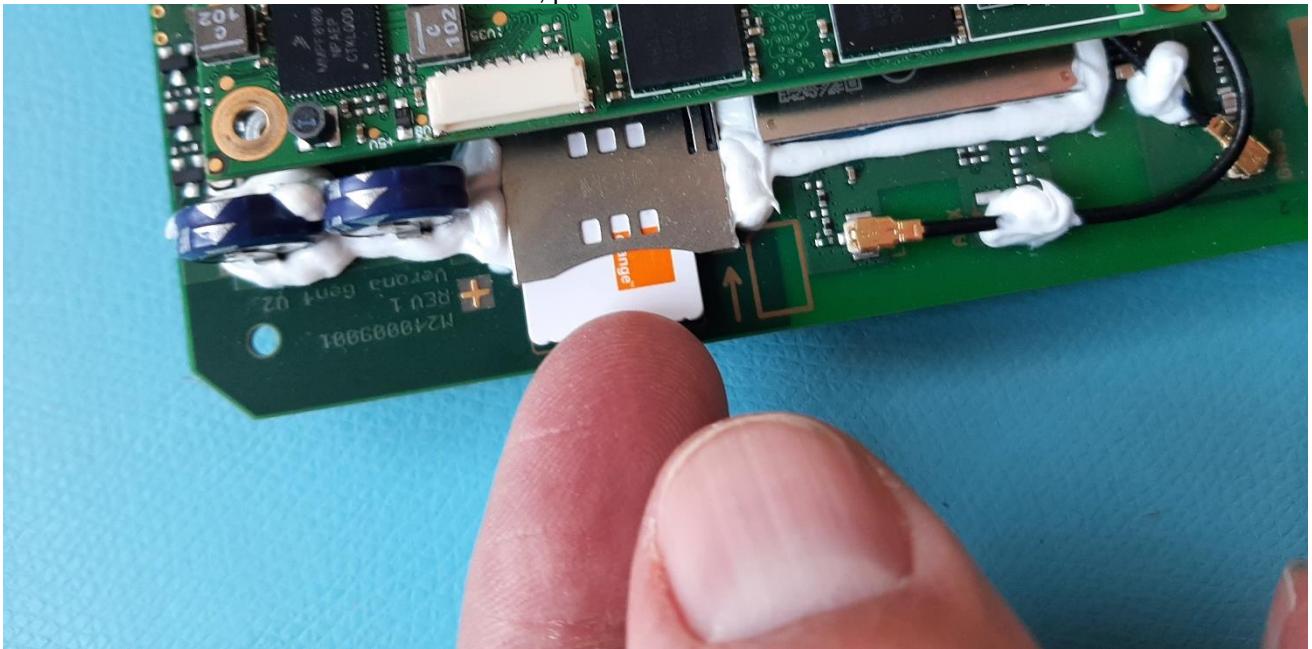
Please the SIM card into the SIM Connector on the PCB. Push carefully in.
